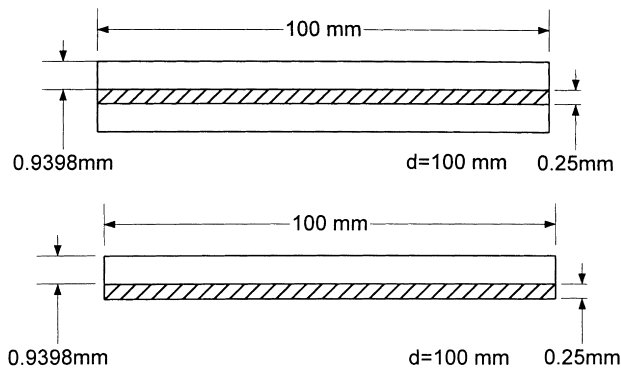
Bond specimen (upper) and tape specimen (lower).
